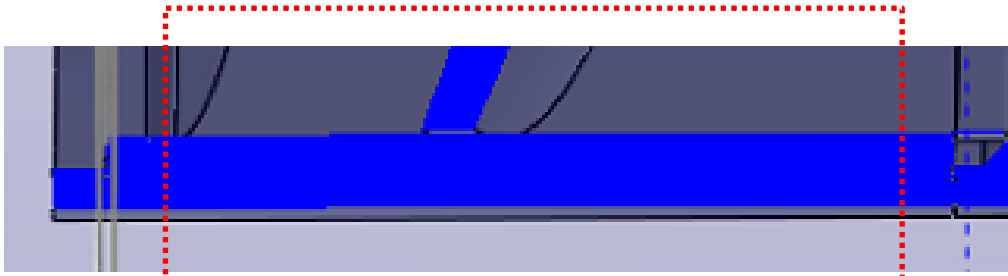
Measurement of the Wear at the Blade Tip and Impeller Housing
